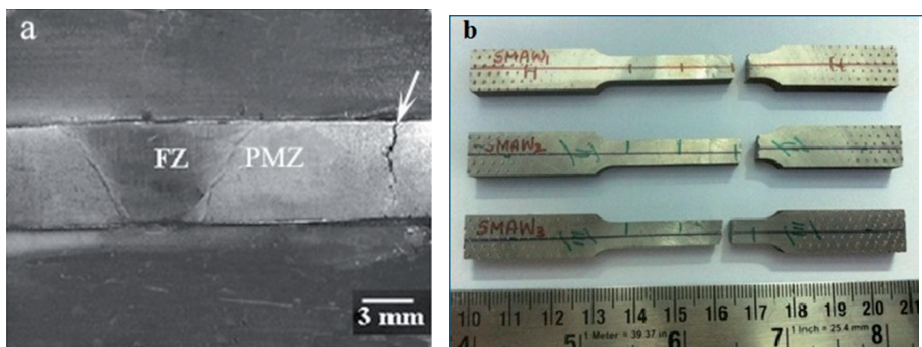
Tensile-tested SMA welds: (a) cross section of a fracture surface, (b) failed specimens (arrow shows failure location)
